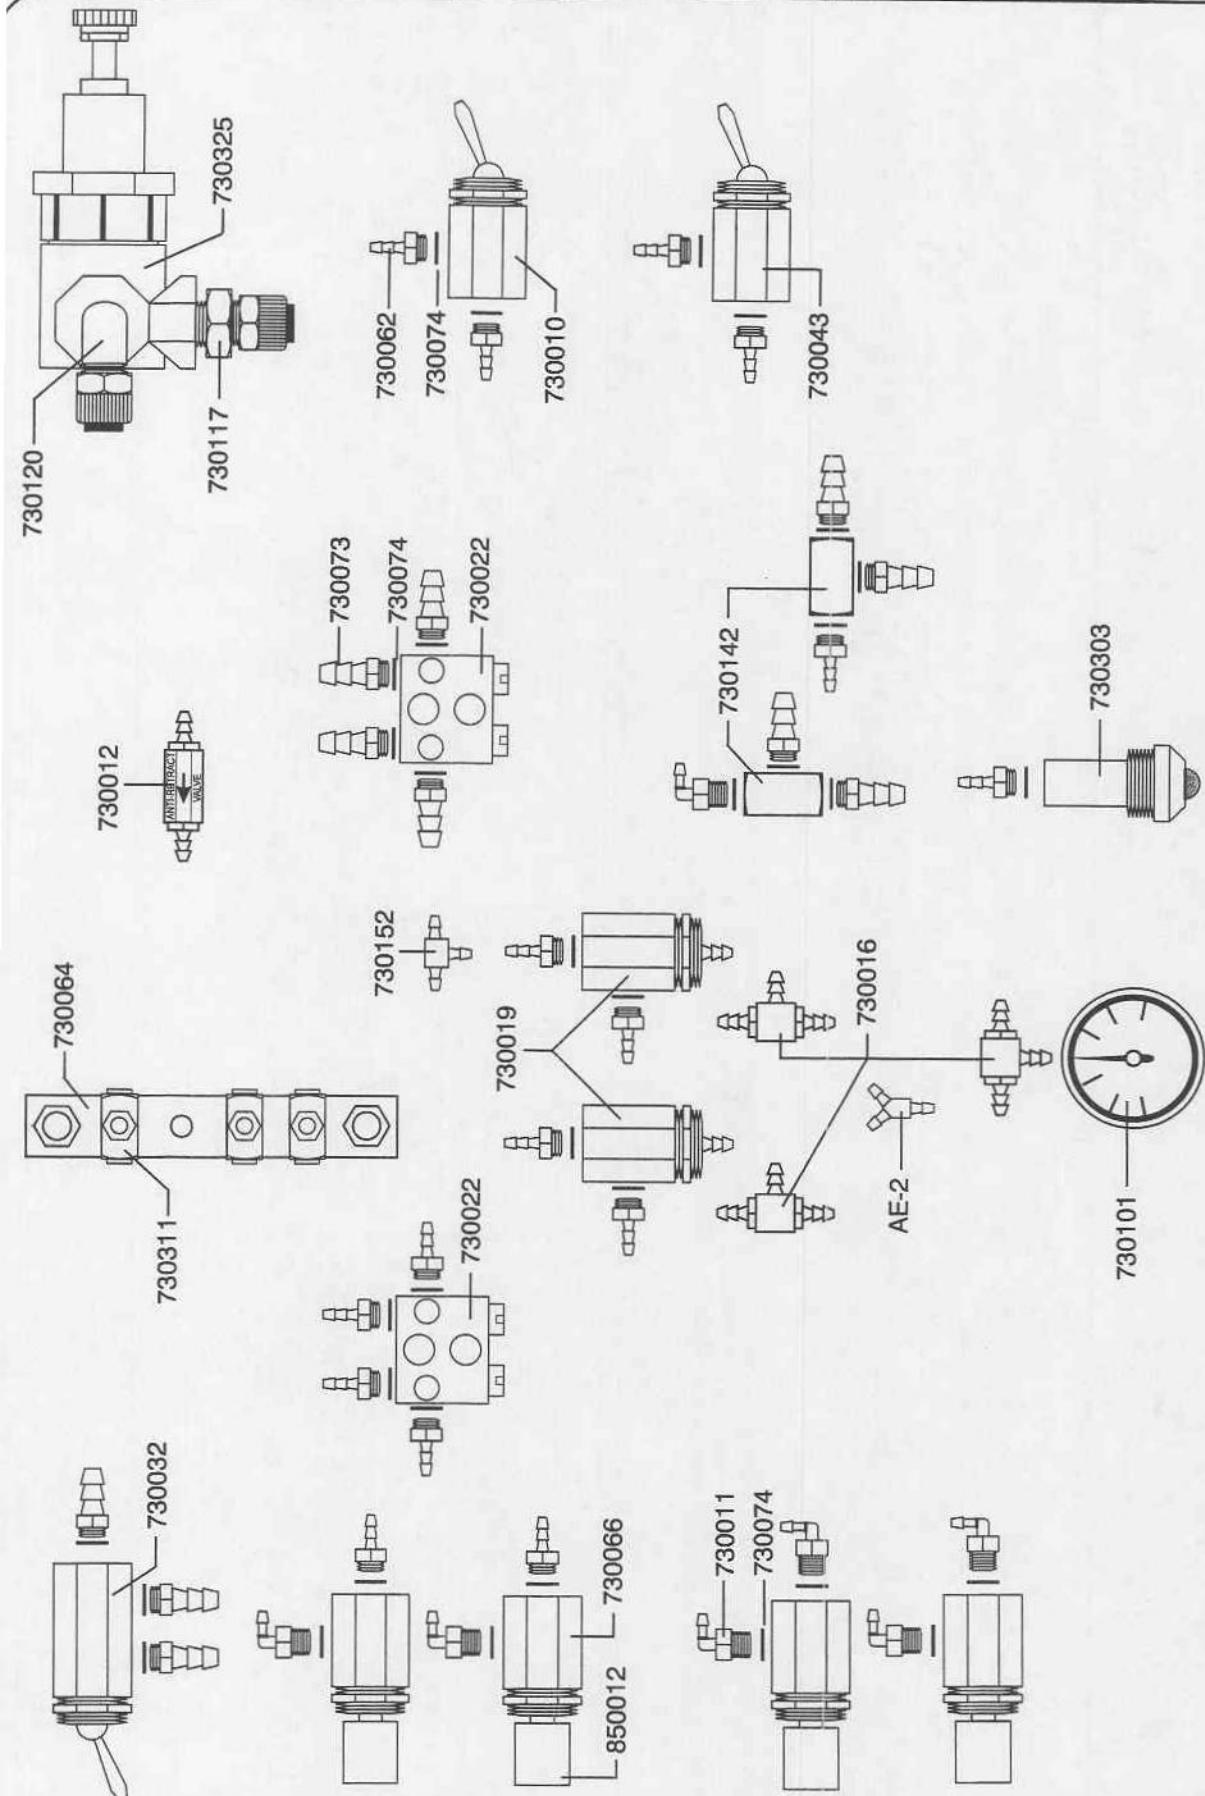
A - ILLUSTRATED PARTS LIST, HANDPIECE CONTROL
